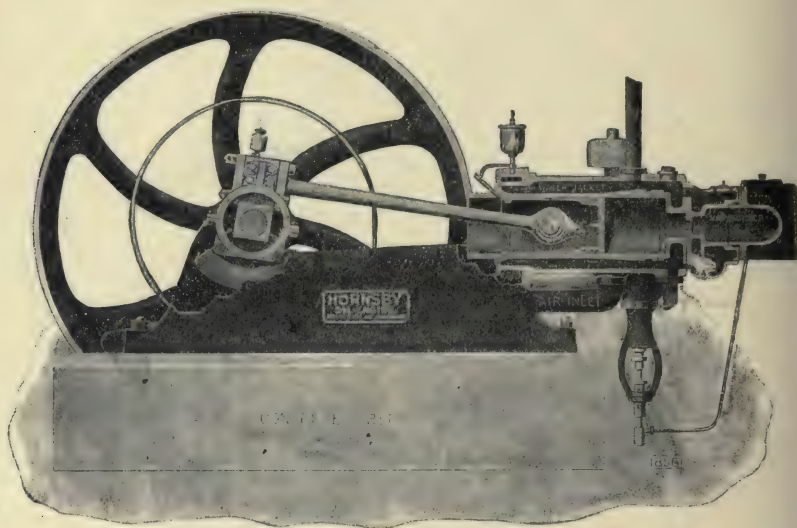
Vaporiser oil engine (Hornsby-Akroyd).
